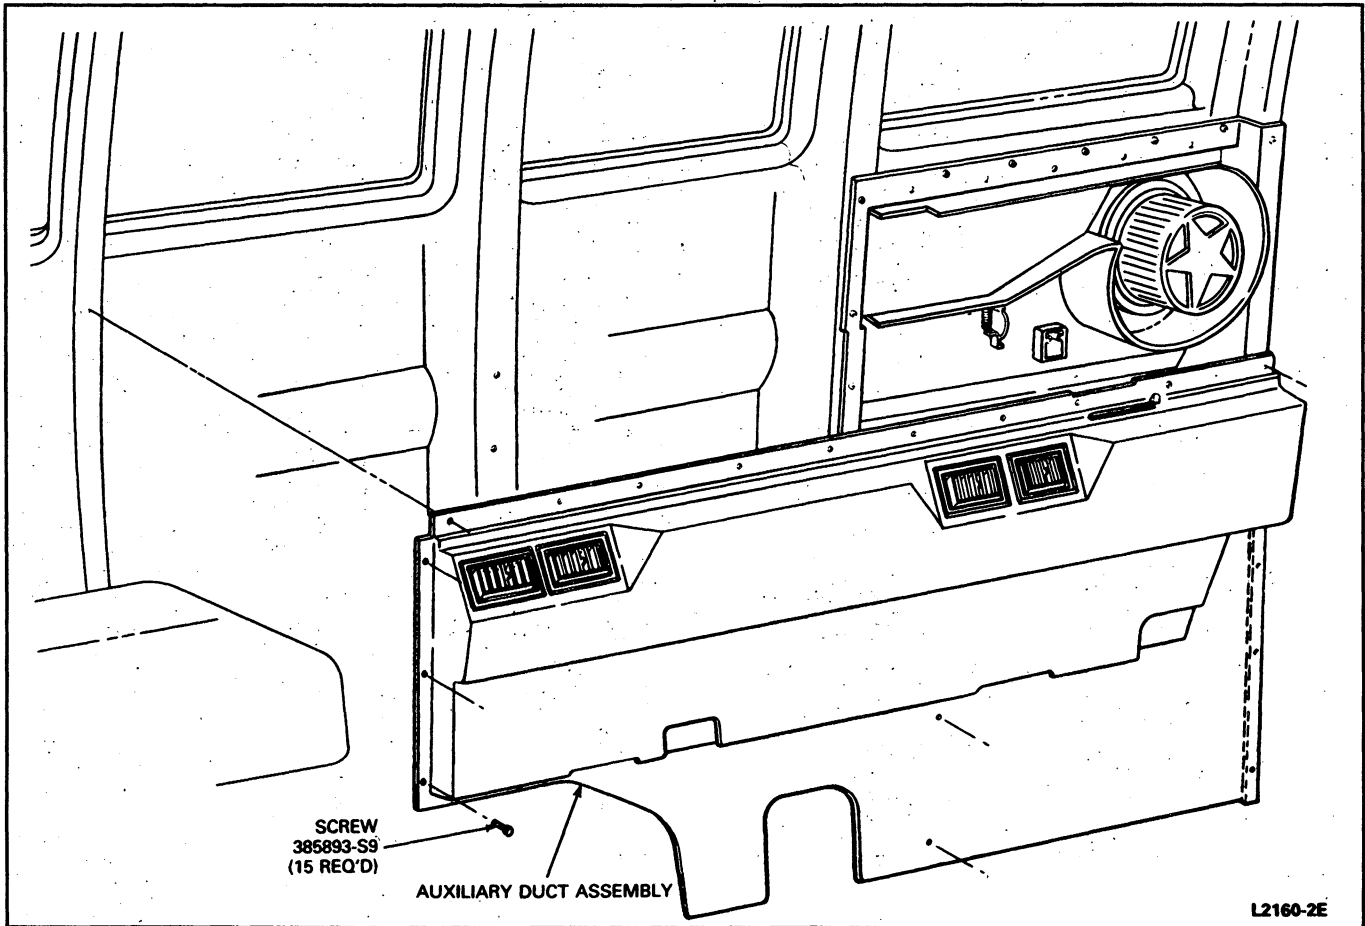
Auxiliary Duct and Trim Panel Assembly
